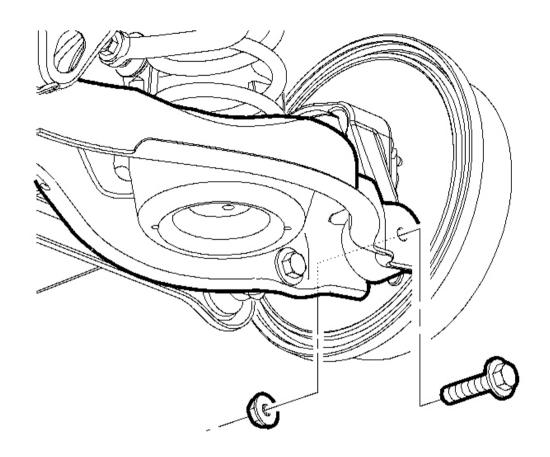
Lower Control Arm, Knuckle Bolt & Nut Courtesy of GENERAL MOTORS CORP.
